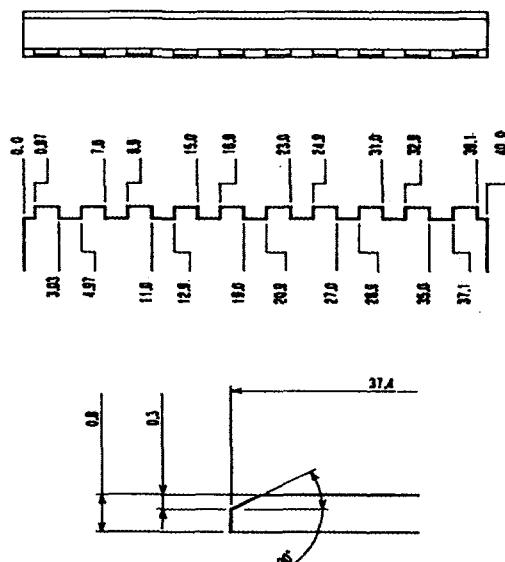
Generated detail drawing of side bending punch for specimen 1
